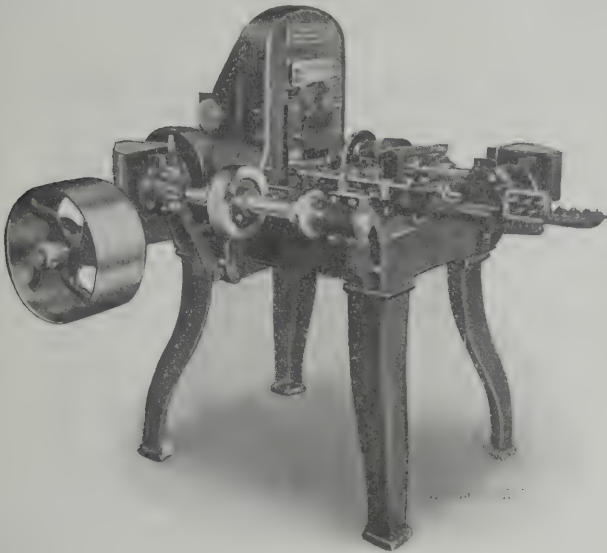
An Automatic Machine for Bending and Stamping Work made from Wire
